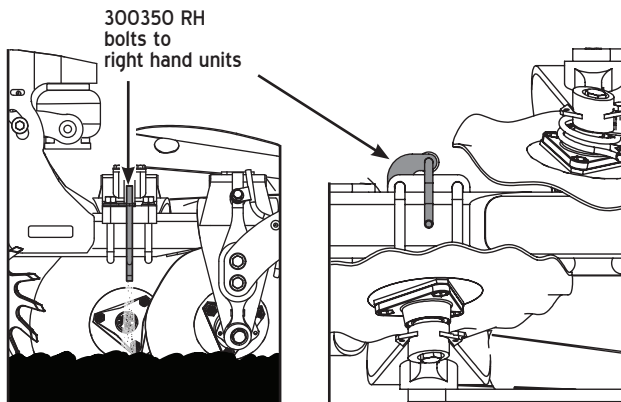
Incorporating Liquid Fertilizer Tube - Side View
